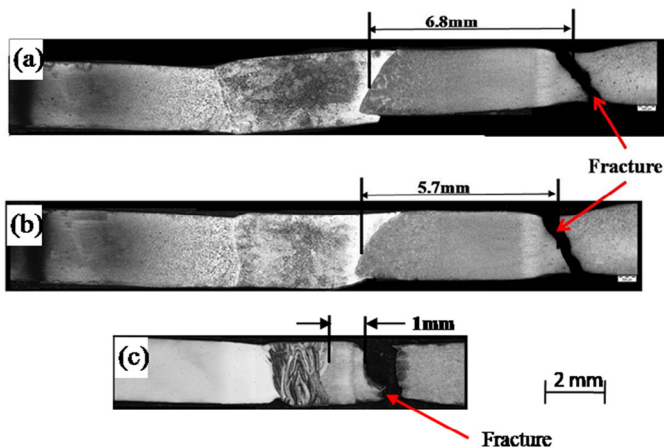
Macro structures of fractured tensile test samples of dissimilar steel welds. (a) Continuous current TIG weld, (b) pulsed current TIG weld, and (c) fiber laser beam weld.
